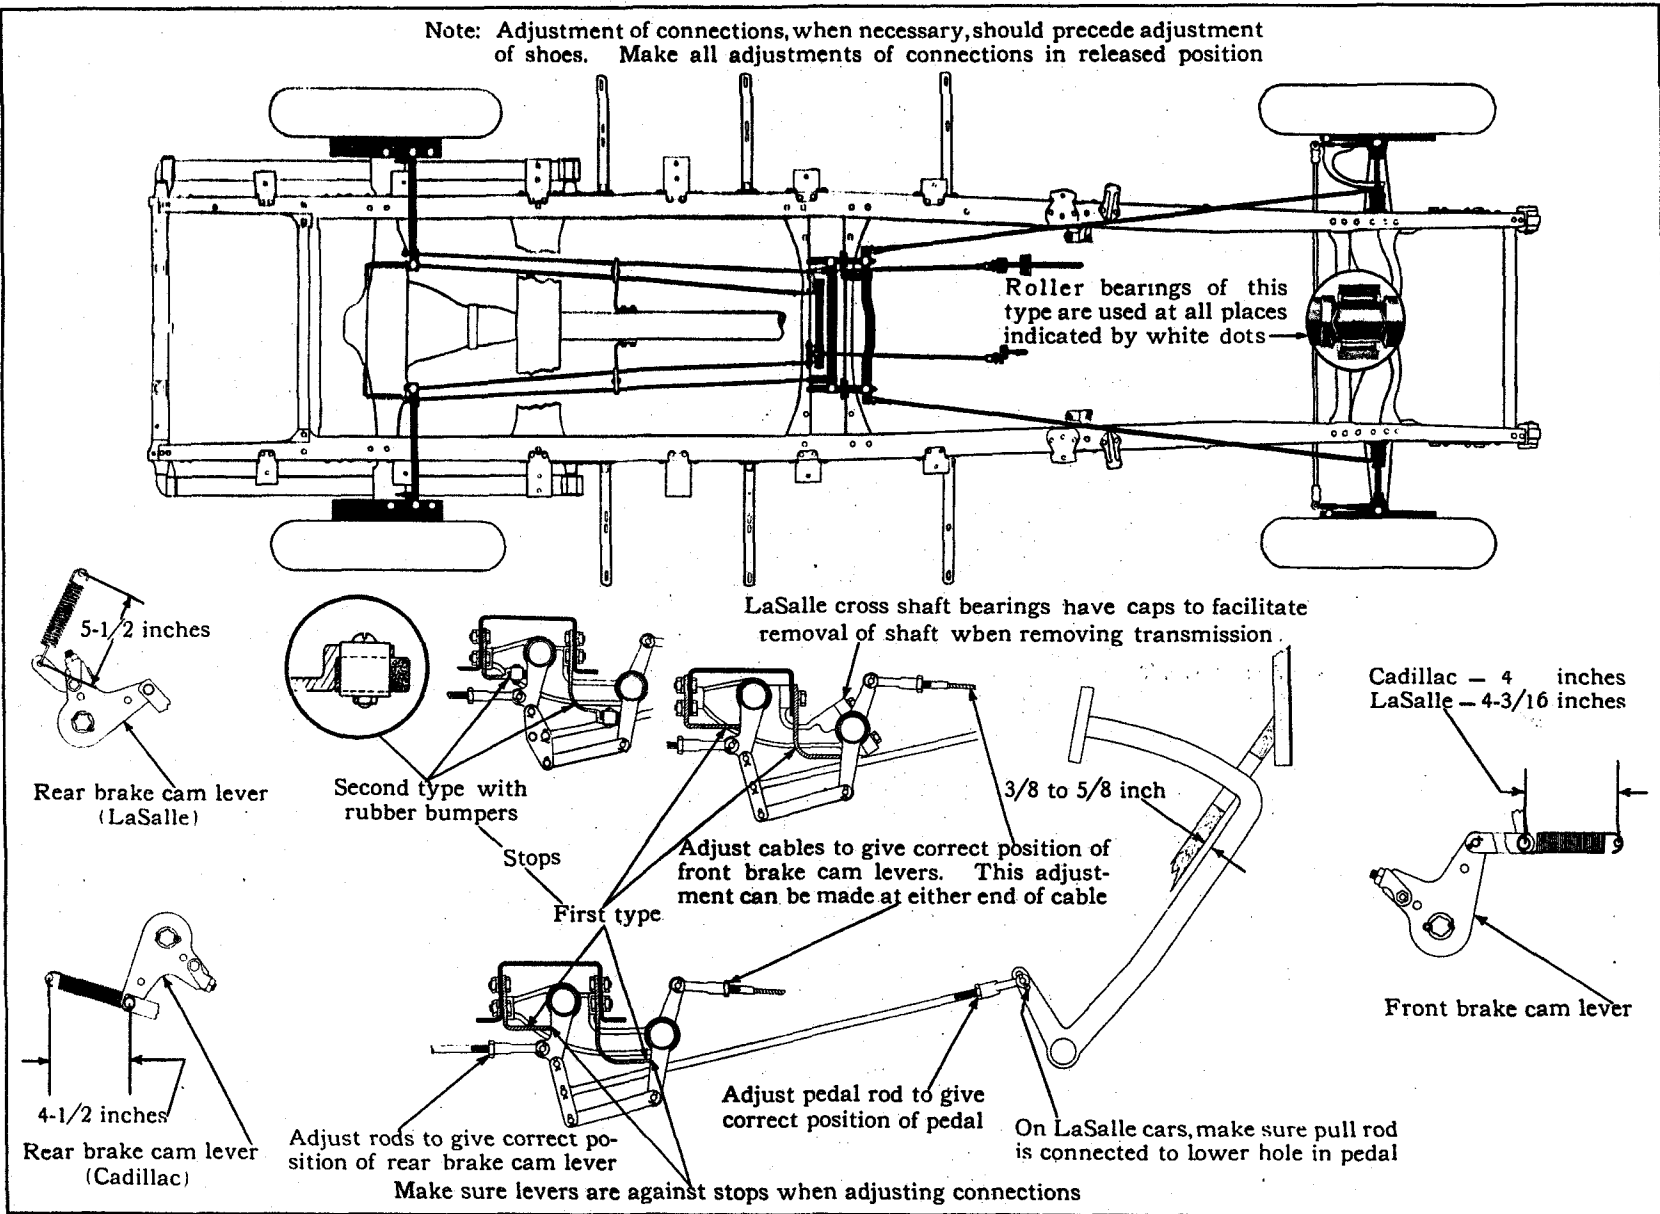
Adjustment of Cadillac 341-B and La Salle 328 brake connections—first type
